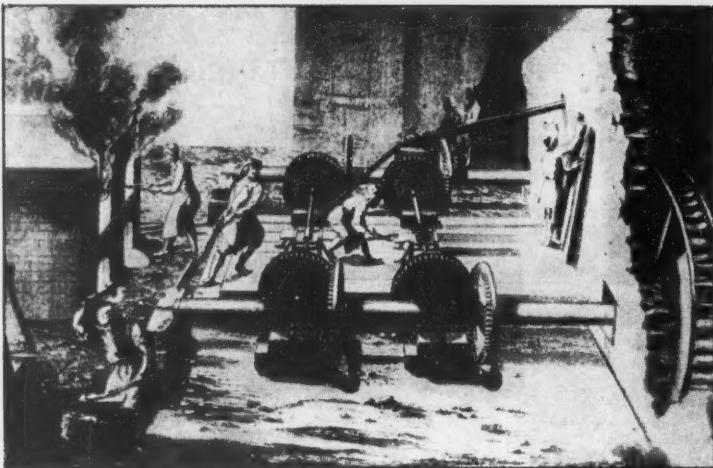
Cutting mill. Stand with smooth rolls (left), cutting stand (center). Water wheel driving the mill is on the right.
